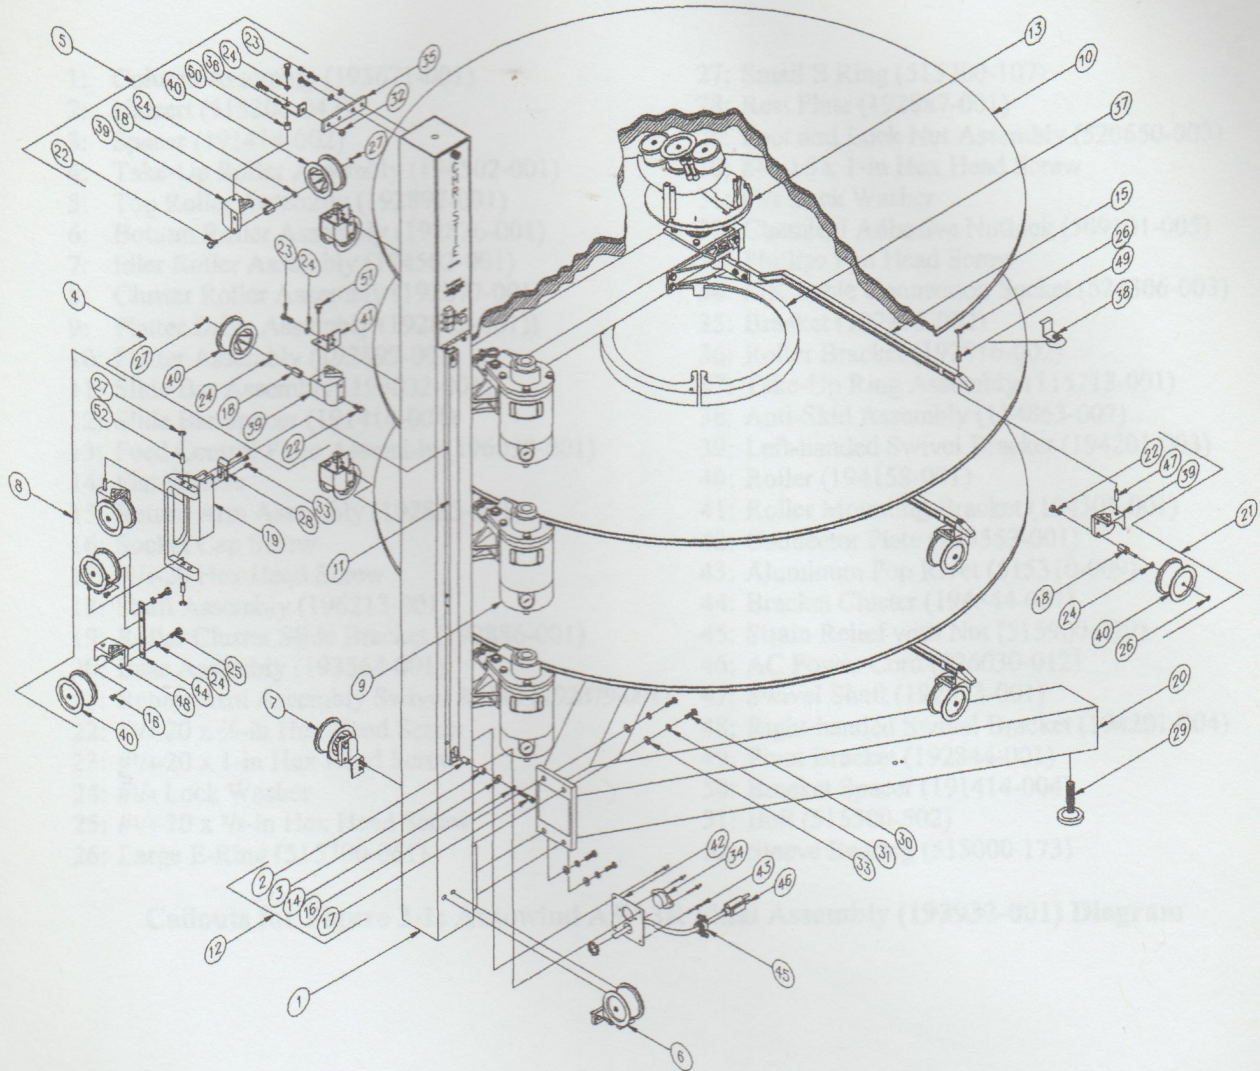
Autowind AW-3R Final Assembly (193932-001) Diagram
